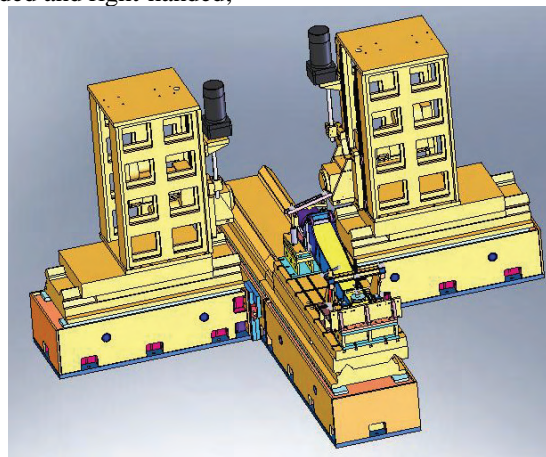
3D Model of the basic variant of an ETS for double sided coaxial processing of openings in welded constructions
